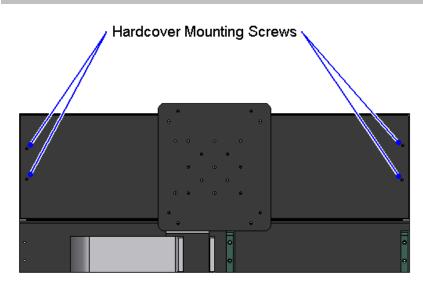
Top view of ALS20000 / ALS25000 Stage Showing Hardcover Mounting Screws
